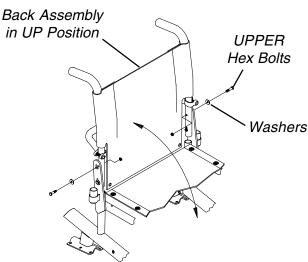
INSTALLING BACK ASSEMBLY - WHEELCHAIRS BUILT BEFORE 10/2000 ONLY
